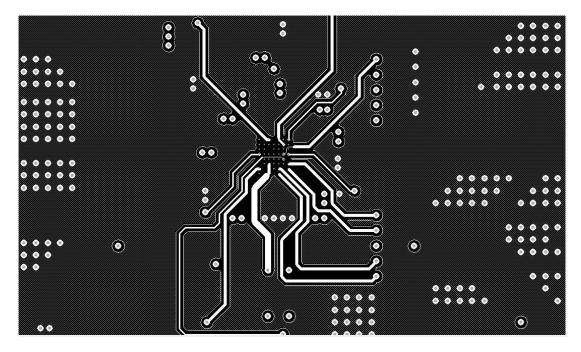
BD71815AGW Reference Board Breakout (Layer 5)
